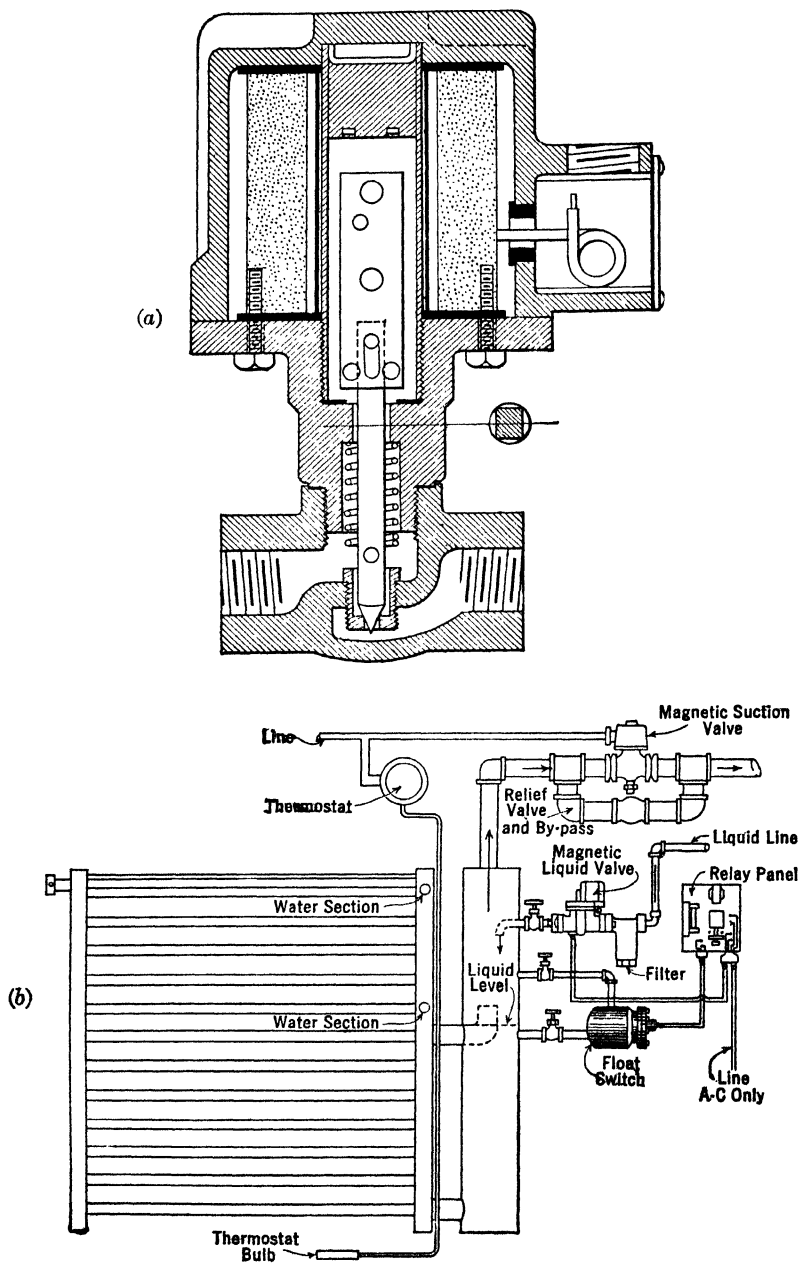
Magnetic valves. (a) Detail of valve. (b) Arrangement of valve in a refrigerating system.
